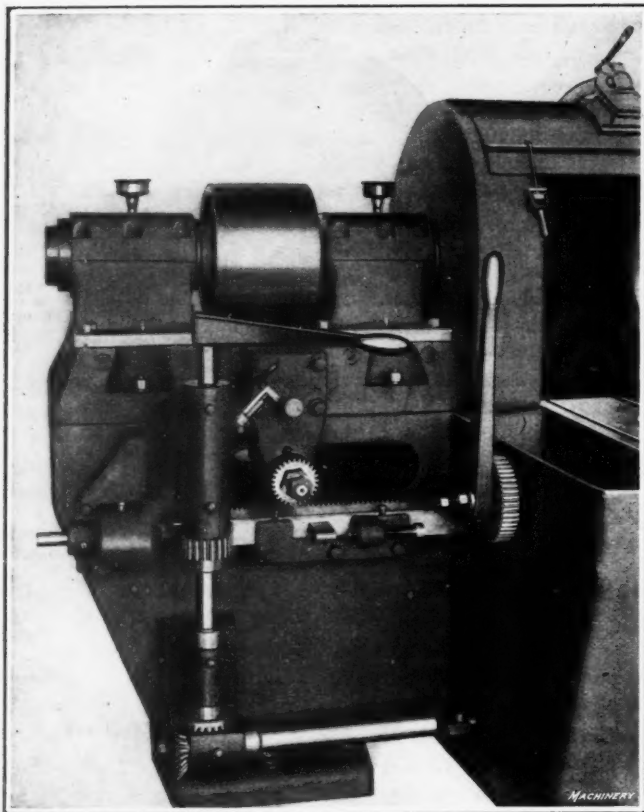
Close View of Feed Mechanism, Micrometer Stop-screw and Adjustable Back-stop
